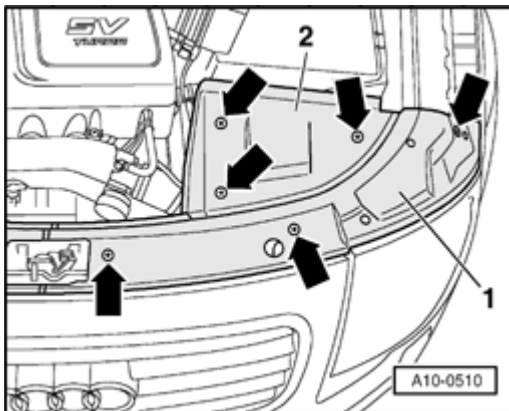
Removing Left-Hand Cover Panels On Lock Carrier And Battery
